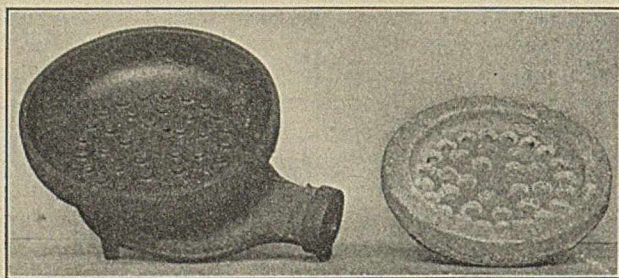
TOP VIEW OF SECOND FORM OF COOK STOVE BURNER; CASTING BEFORE DRILLING AND FIRE BRICK LINING
